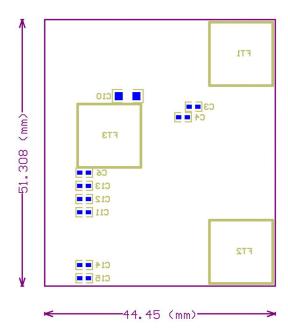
NCV7429 EVB PCB Bottom Assembly Drawing
